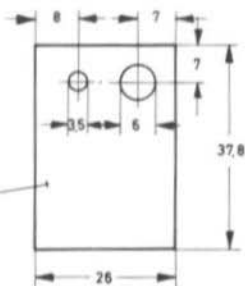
Mechanical parts of the VFO; dimensions in mm
